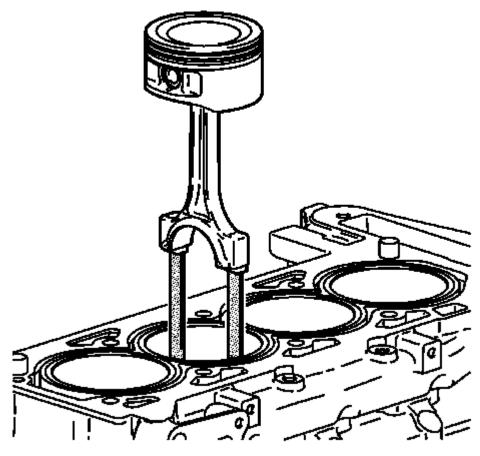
J-43966-1 Installed Into Connecting Rod Bolt Holes Courtesy of GENERAL MOTORS CORP.
